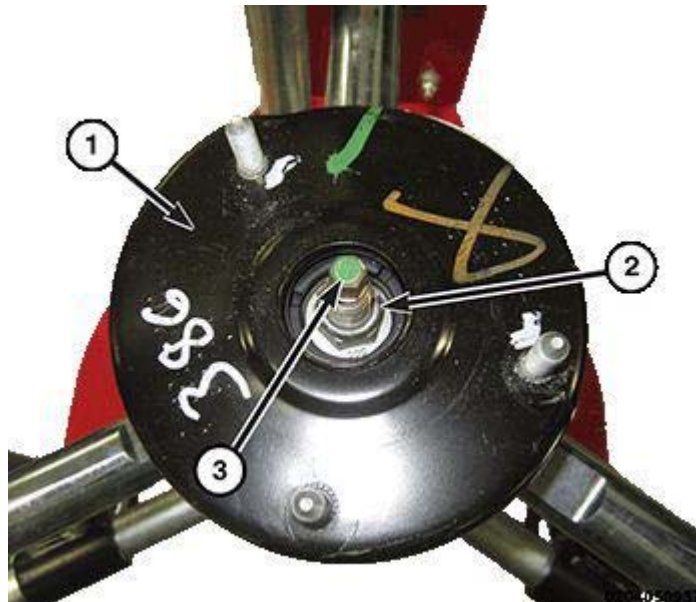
Removing/Installing Shock Absorber Shaft Nut
